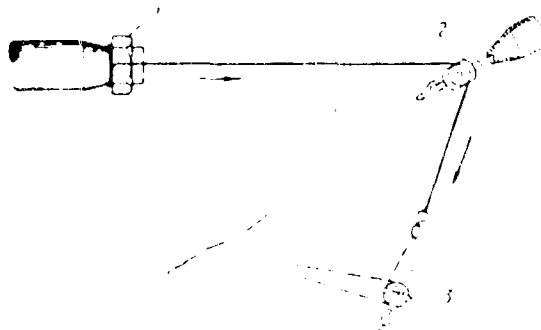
Diagram Showing Removal of Shaft by Traction Method Using a Shore-Mounted Snatch Block: 1 - propeller shaft with clamping nut; 2 - snatch-block; and 3 - differential pulleys.
